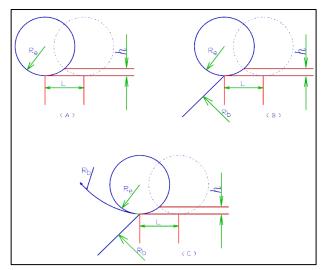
Equal Residual Height Method. (A) Flat Machining. (B) Convex Surface Machining. (C) Concave Surface Machining.
